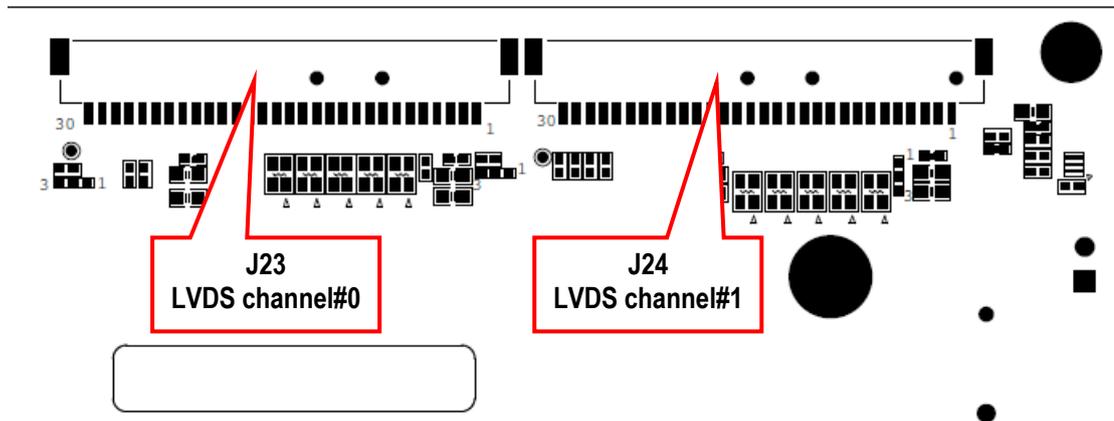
COM Carrier Board, LVDS Interface Connectors on Bottom Side
